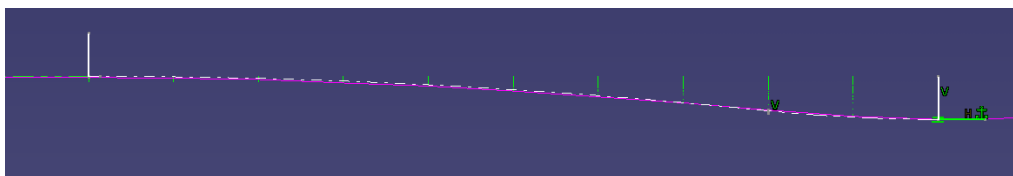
CMM data (pink solid line) and specified geometry (white dashed line) of Ø22.2 mm/ 0.57 mm deep NC machined surface flaw
